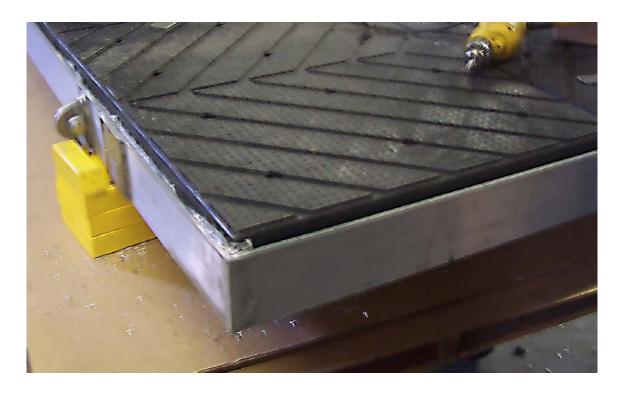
A closer look at a corner of the walkway with the upper Endura-Form panels in place but not yet bolted. The Endura-Form panel surface is grooved for maximum drainage and has a dimpled surface to allow for good traction. The Endura-Form panel assembly is held in place in the aluminum tray with tabs placed at appropriate intervals. A yellow walkway stand is visible on the left.
